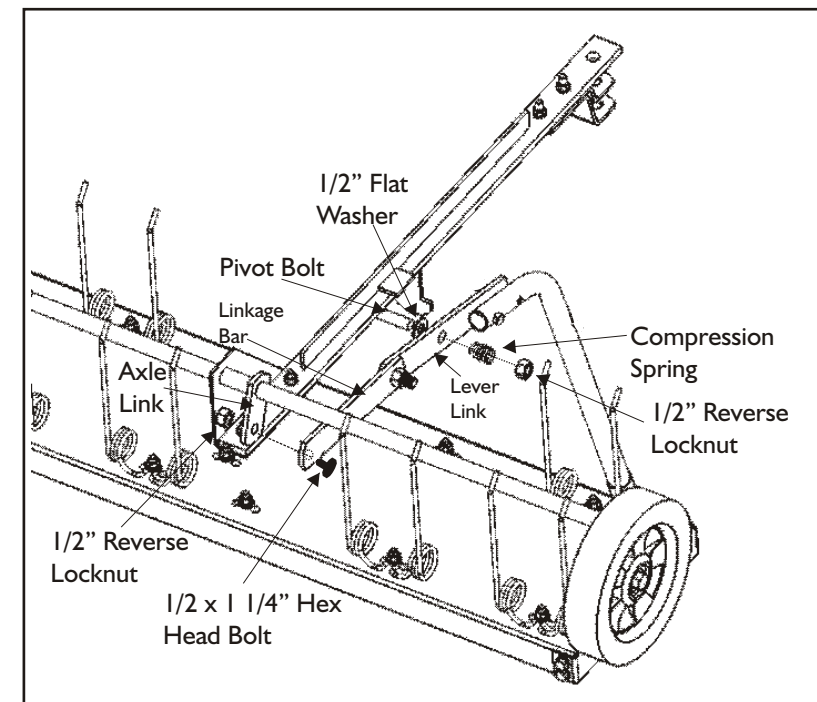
Remove 1/2" Reverse Lock Nut and Compression Spring from Pivot Bolt (leave on the 1/2" Flat Washer). Slide the Lever Link onto the Pivot Bolt. Then put back on Compression Spring and Reverse Lock Nut.
